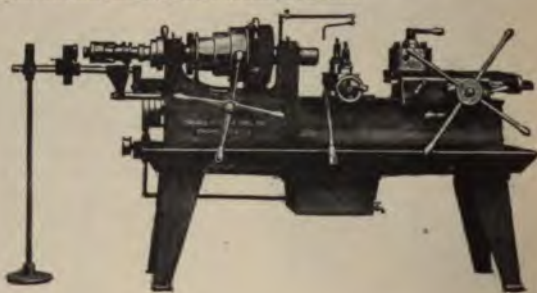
NO. 1½ FRICTION HEAD MACHINE.
